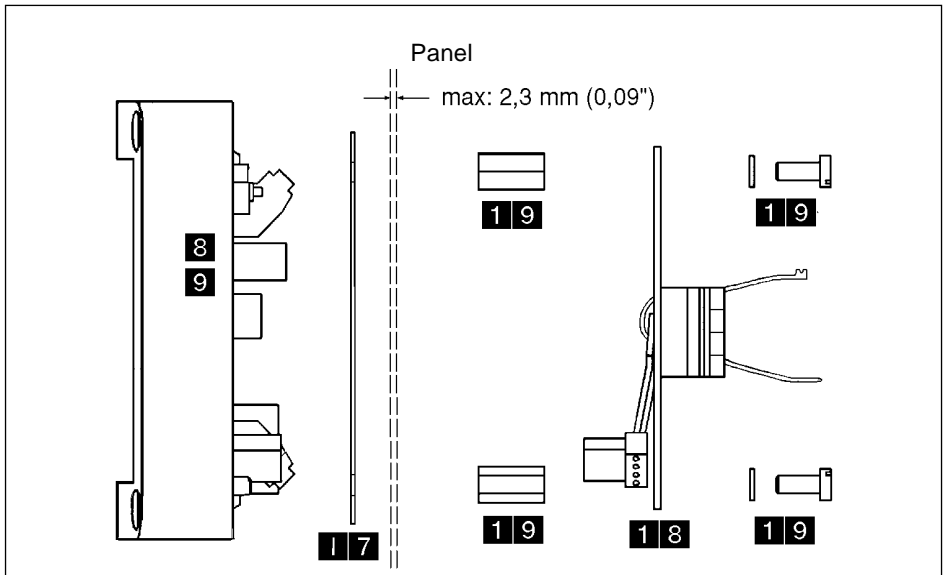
Spare Parts Explosion Drawing 8025 Panel Version
